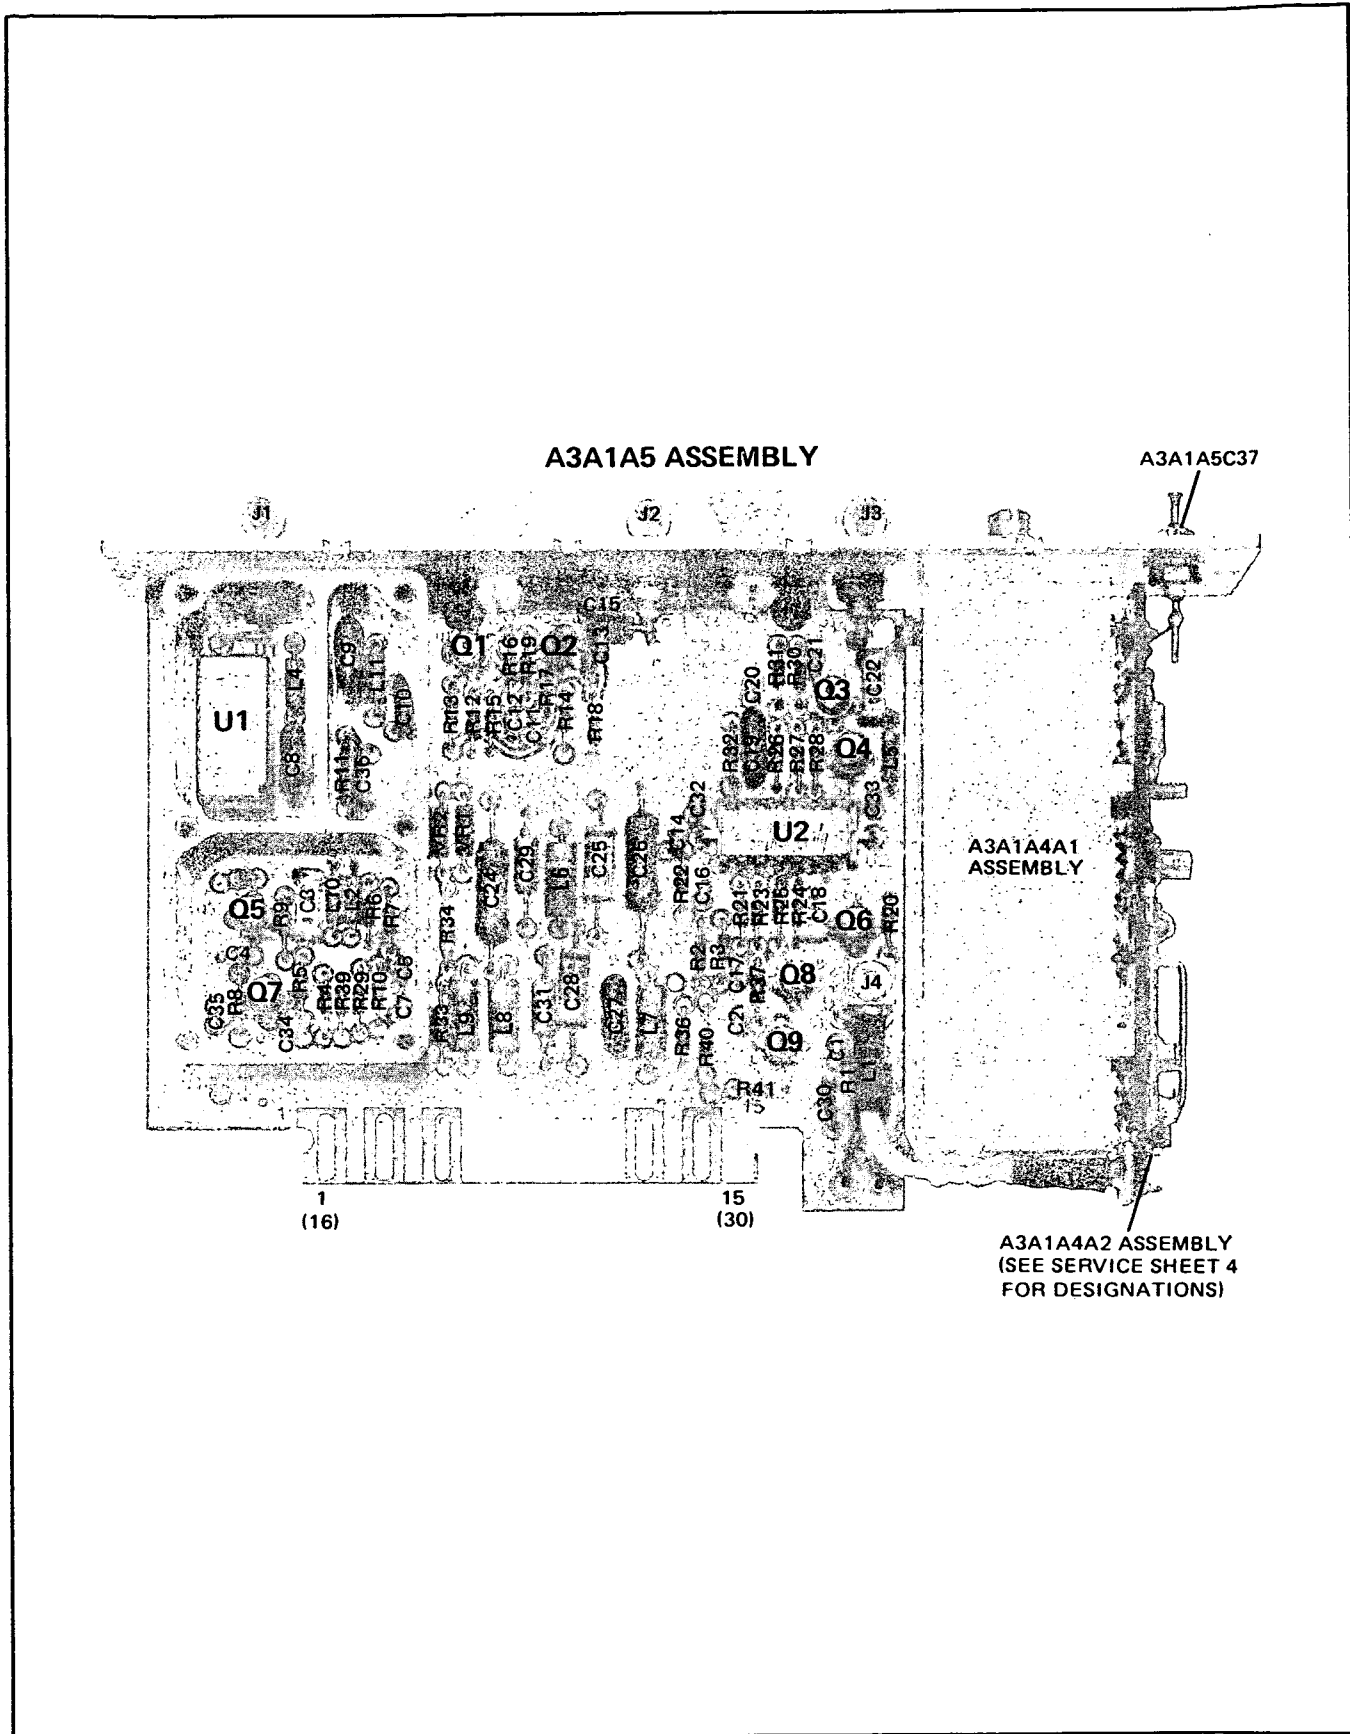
A3A1A5 M/N Output Assembly Component and Test Point Locations
